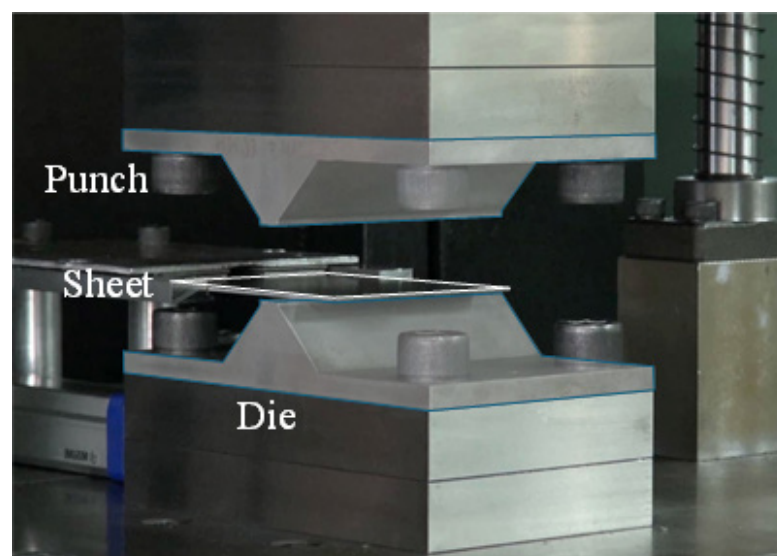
Experiment setup for successive forging of JSC1180YN UHSS sheet
